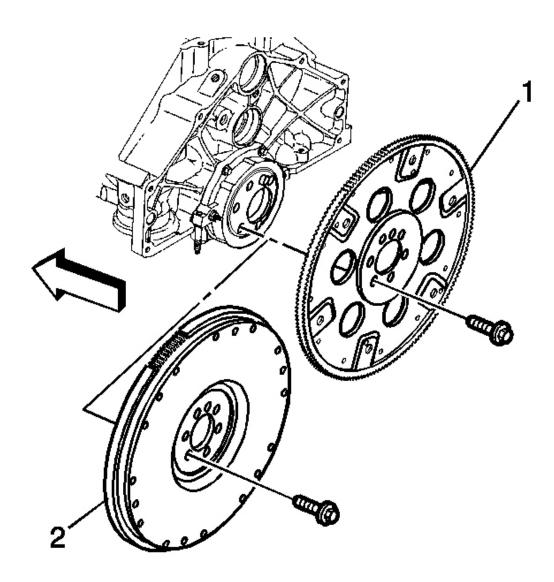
View Of Flywheels Courtesy of GENERAL MOTORS CORP.
